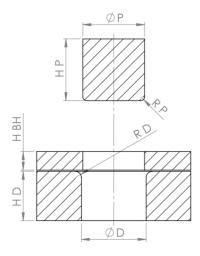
Geometry of the drawing tool used in deep drawing cup test [source: own study]
